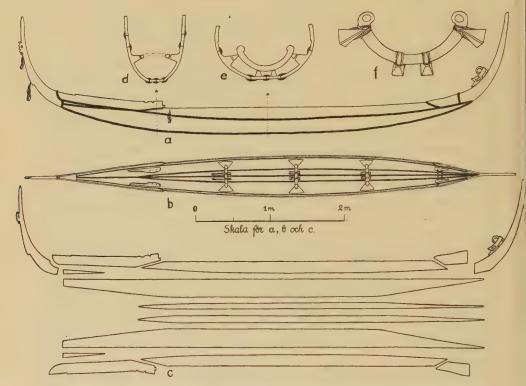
Plan showing constructional details of the ora canoe of the Solomon Islands.
